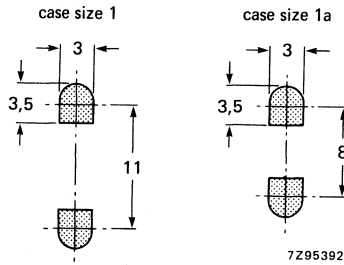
Recommended dimensions of metal connection pads on printed-circuit board or substrate surface.
